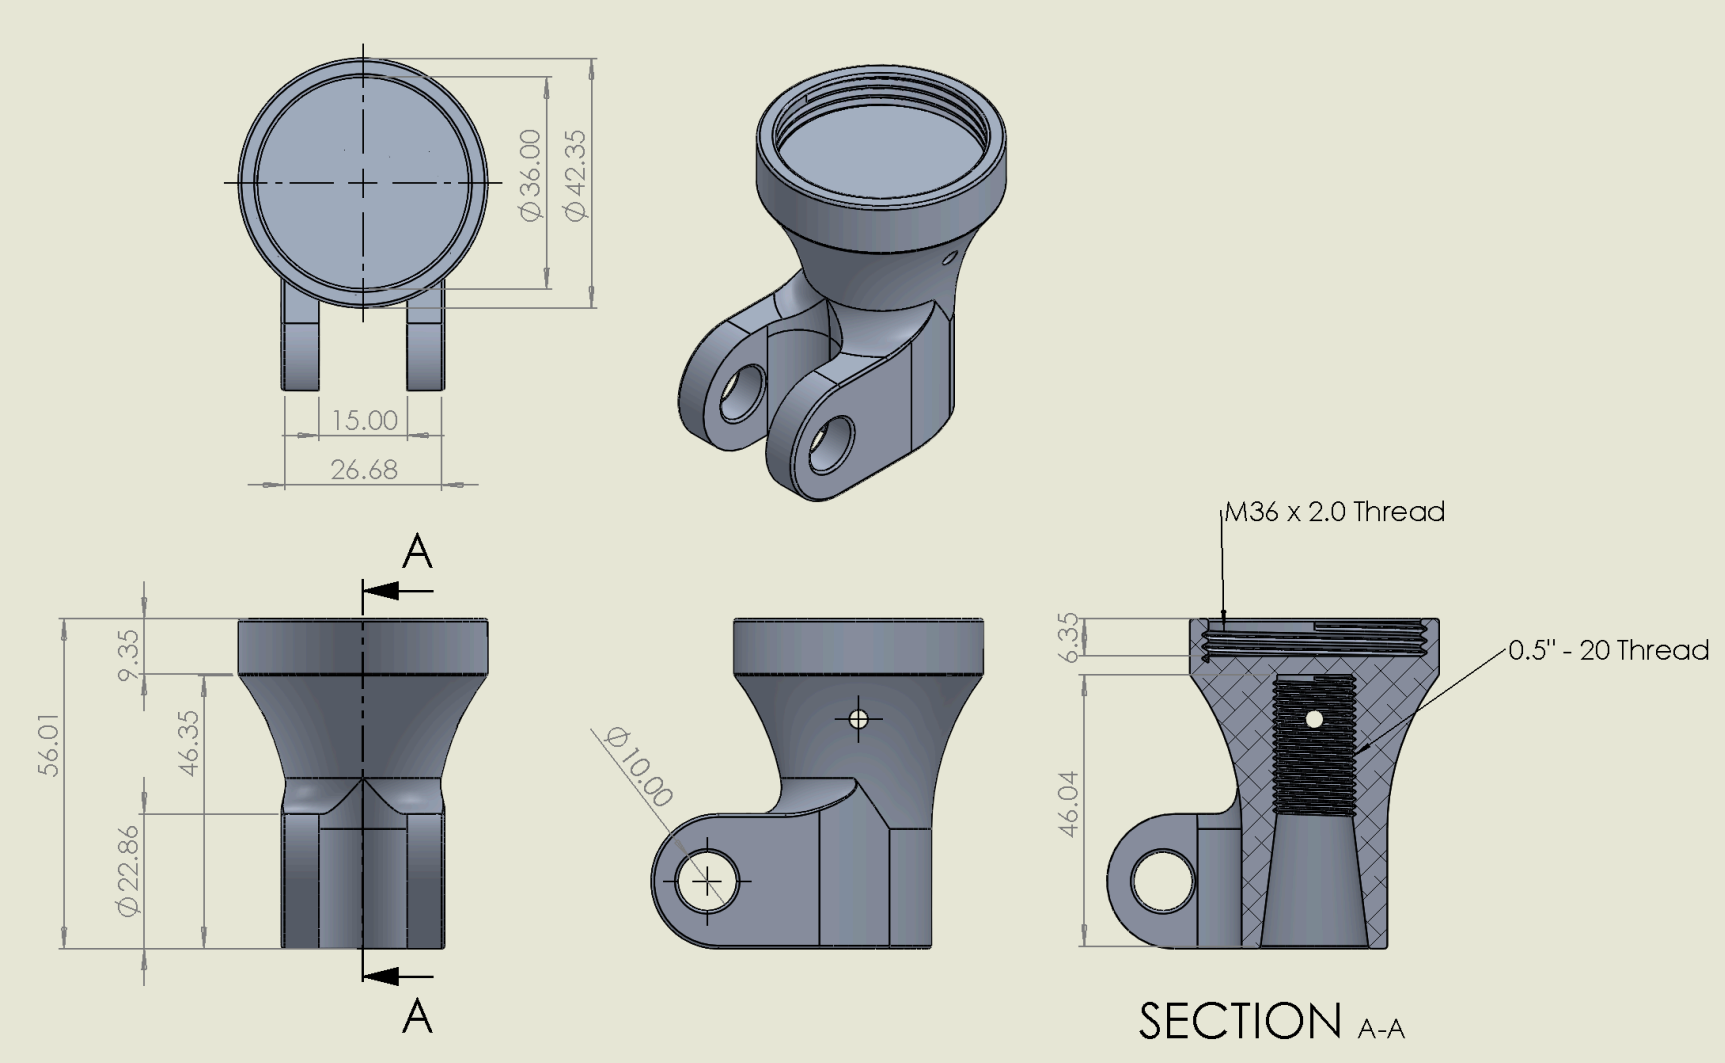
Ball Joint Stud Attachment Bracket Drawing
